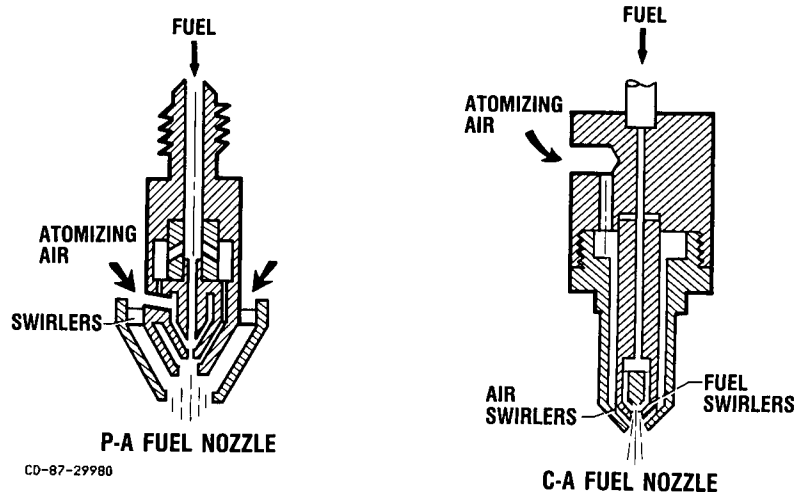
TEST COMBUSTOR FUEL ATOMIZING NOZZLES.
